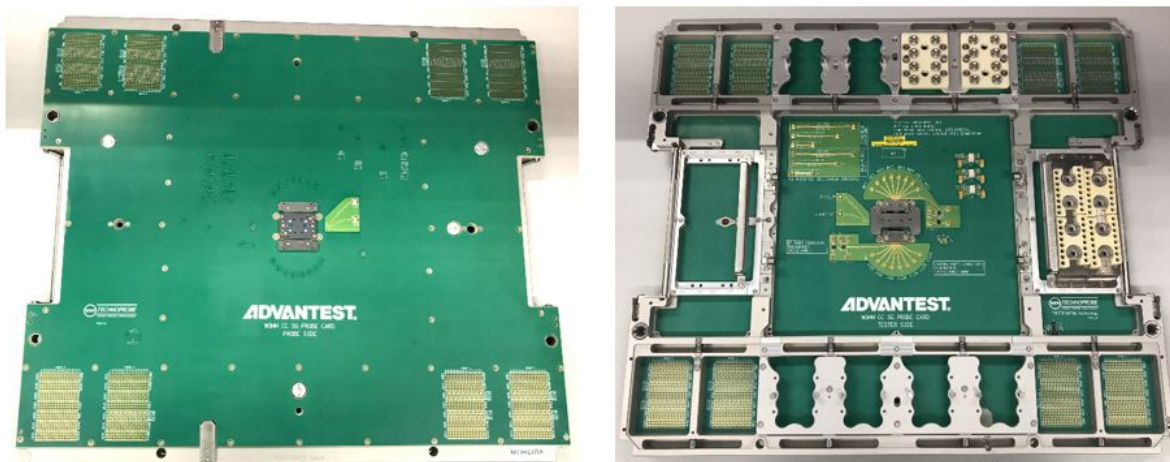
Top and bottom part of a DUT wafer probing test fixture.
